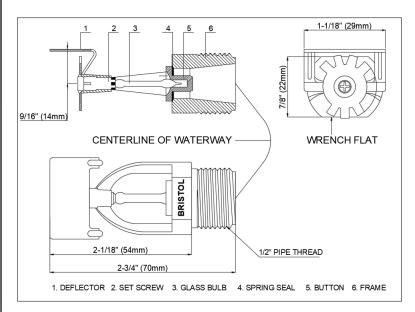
FIGURE A: MODEL BF007 / BF008 HORIZONTAL SIDEWALL SPRINKLERS
